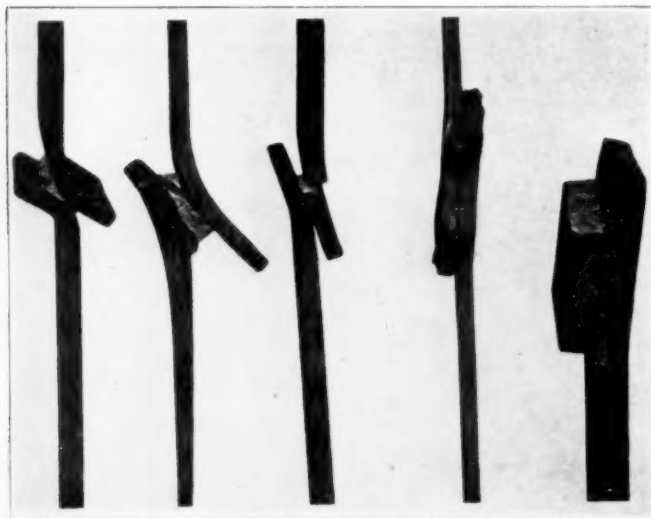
ELECTRICALLY WELDED STEEL PLATES AFTER BEING TESTED IN TENSION
